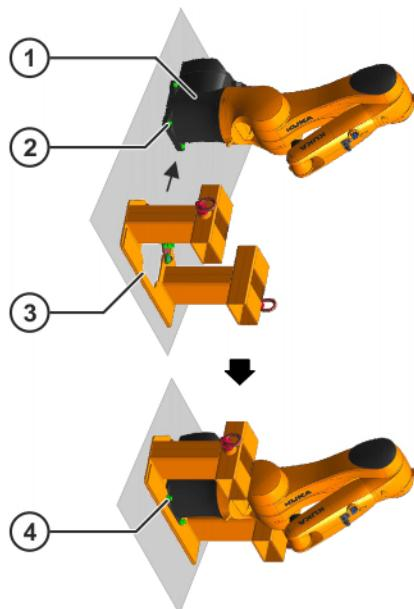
Fastening the Load Lifting Attachment to the robot
